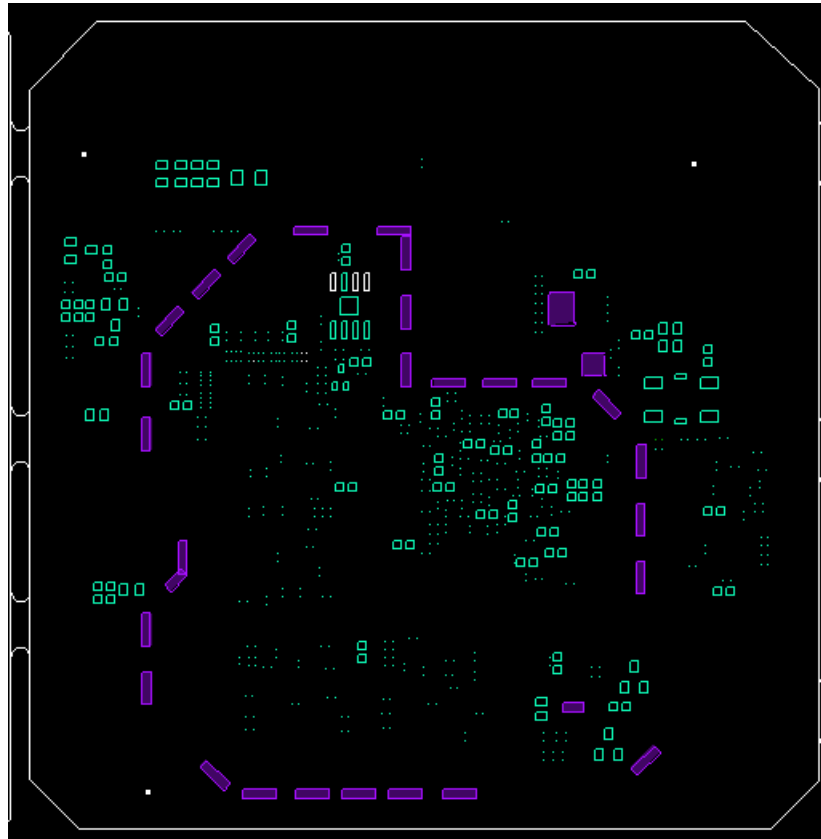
Shield cover at the bottom side of the Hi3798M DMO1C board
